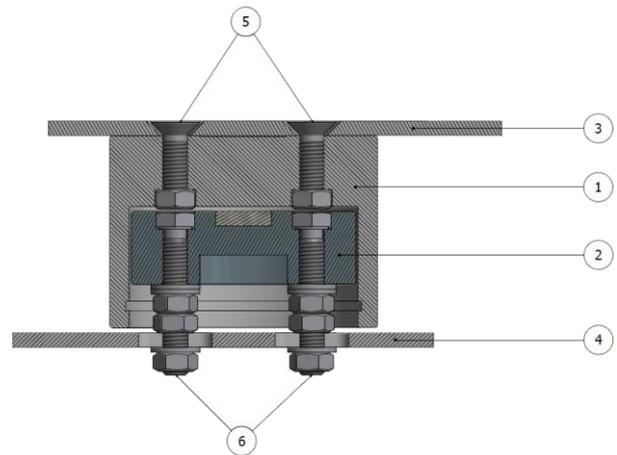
SCHEMATIC DRAWING OF WHEEL ANGLE SENSOR WHEN MOUNTED
